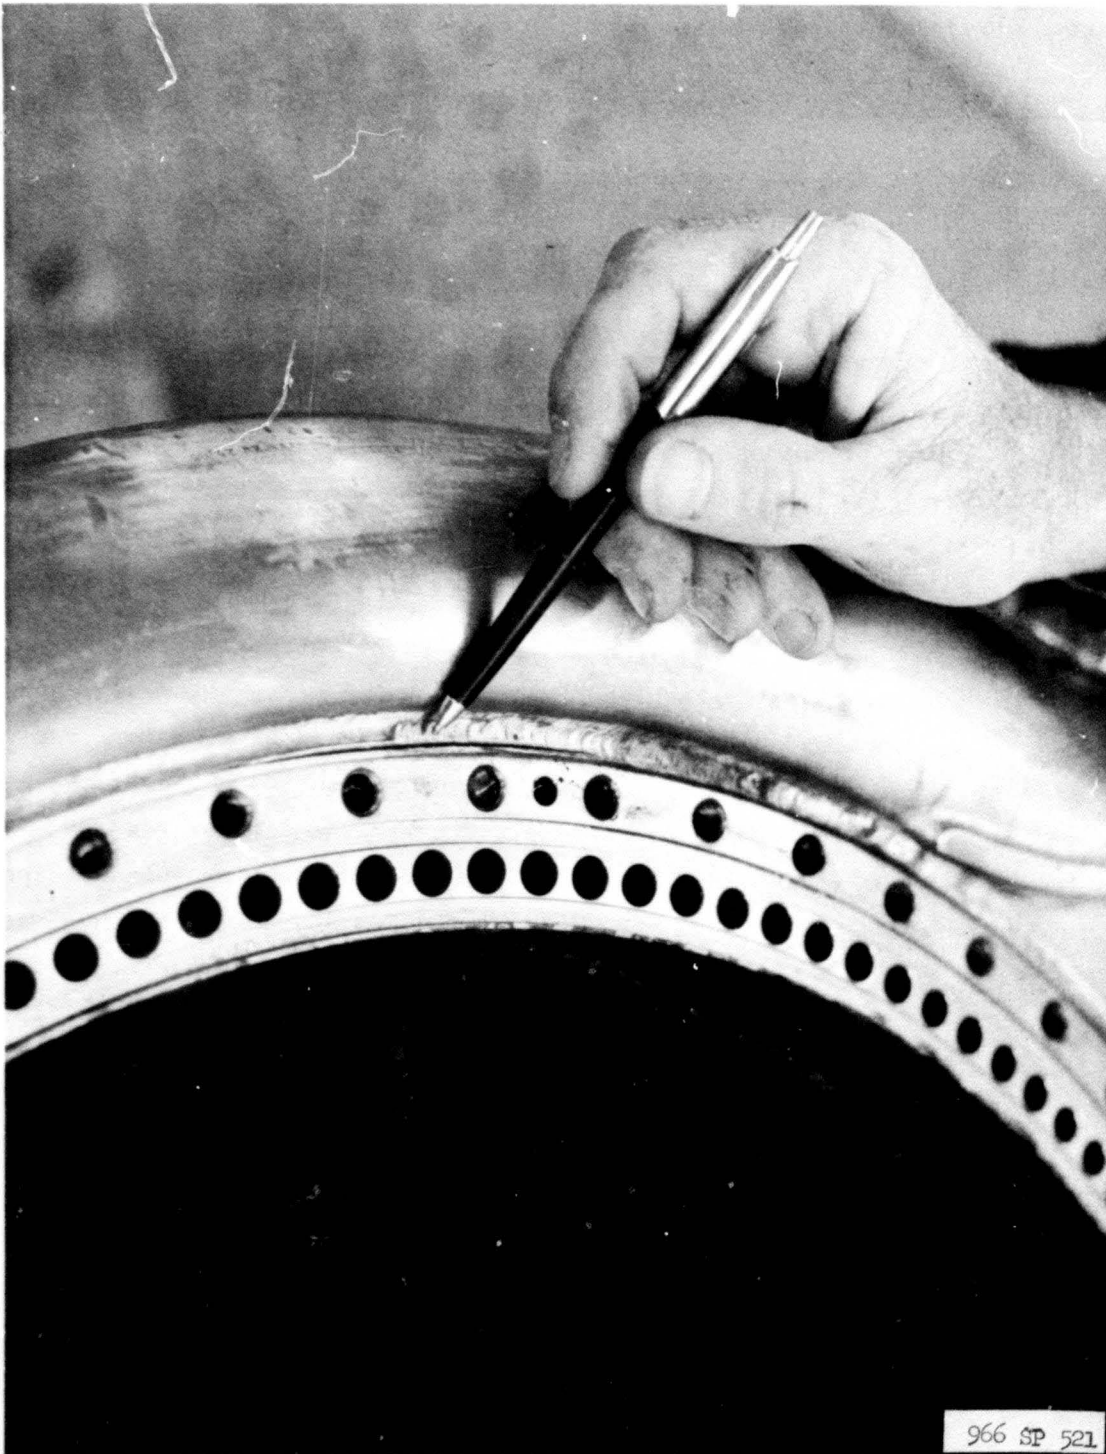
Combustion Chamber S/N 004, Showing Torus Crack
